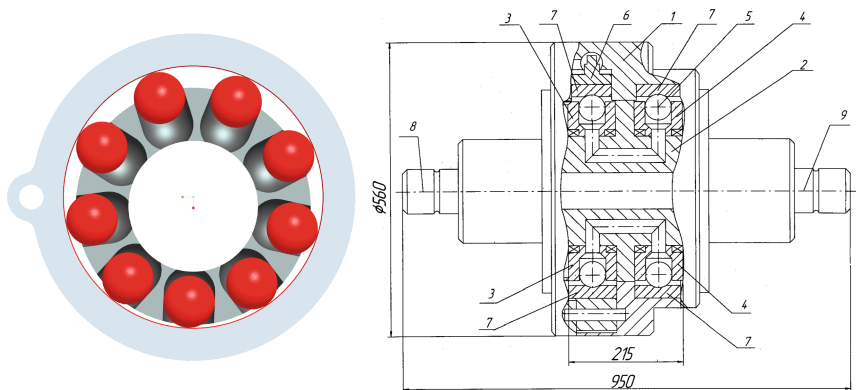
The hydro volumetric transmission GOP-900 with ball pistons: 1 – housing; 2 – block of pin distributors; 3 – pump cylinder block (rotor); 4 – cylinder block of the hydraulic motor (rotor); 5 – ball-piston; 6 – pump stator; 7 – a running track of the pump and the hydraulic motor; 8 and 9 – input and output shafts of hydraulic transmission [2, 3].
